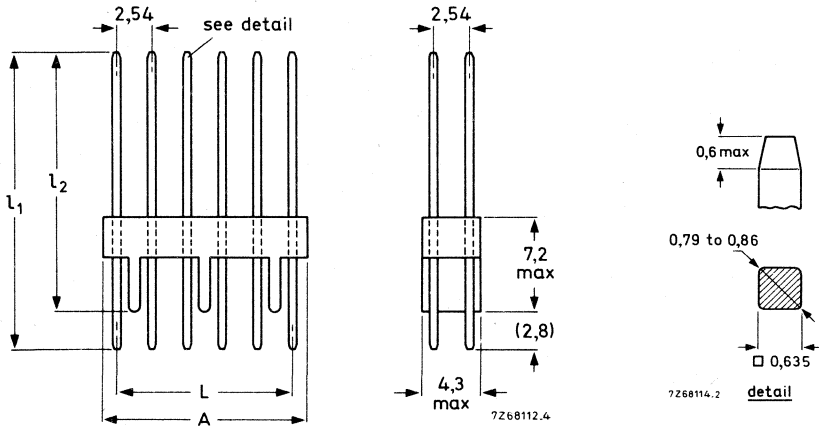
Mounting block for pins, double row. See Table 5 for dimensions l_1 , l_2 , A and L.
